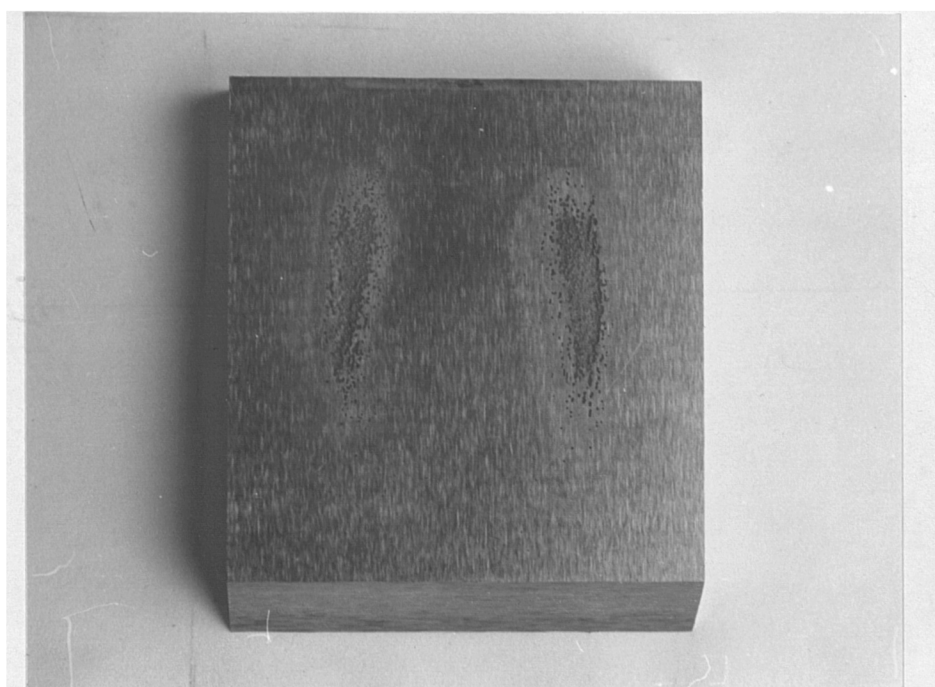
MACROSCOPIC VIEW OF GROSS DAMAGE IN TOOL STEEL
